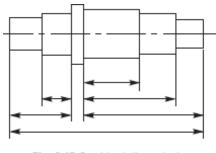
Combined dimensioning Co-ordinate dimensions
